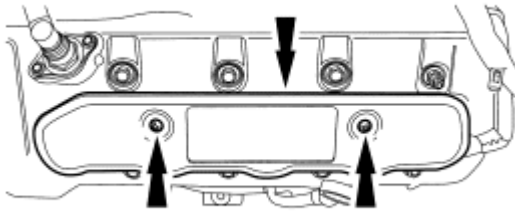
Detaching Wiring Harness Retainers From LH Valve Cover Stud Bolts
